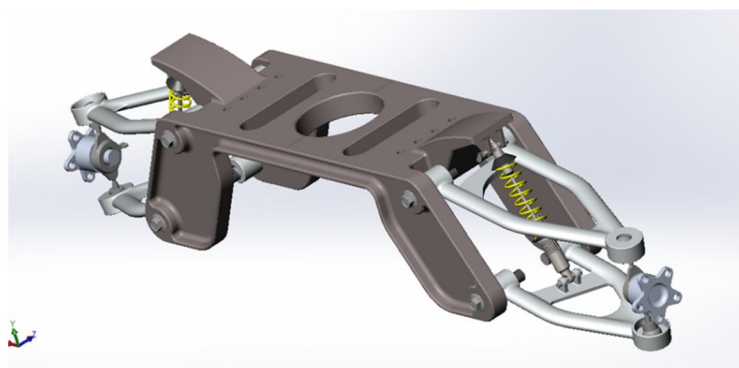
Fig. 7 Double Wishbone Suspension System Assembly
